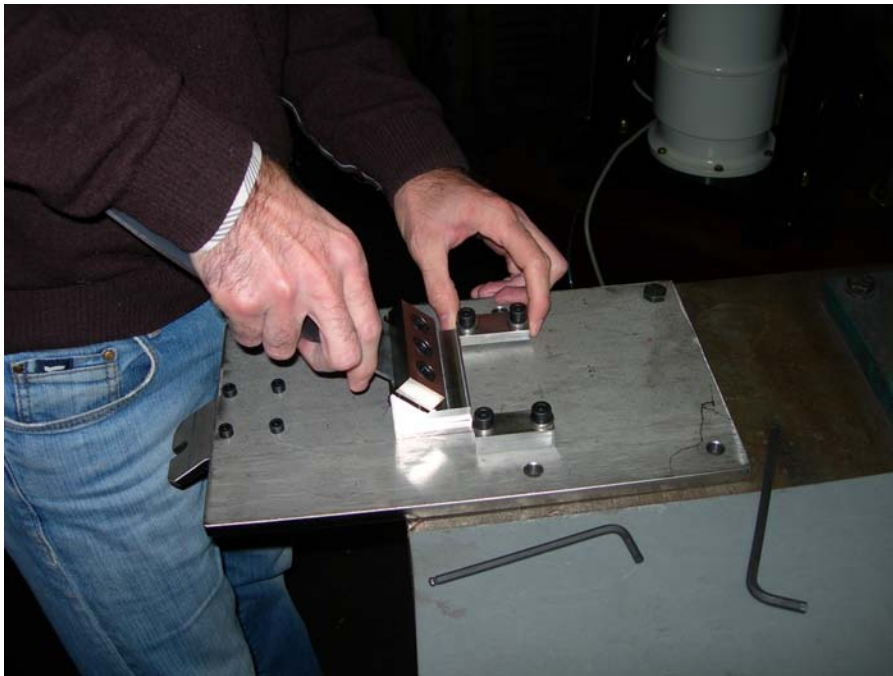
Above: pulling handle on blade and retaining holder fixture.
